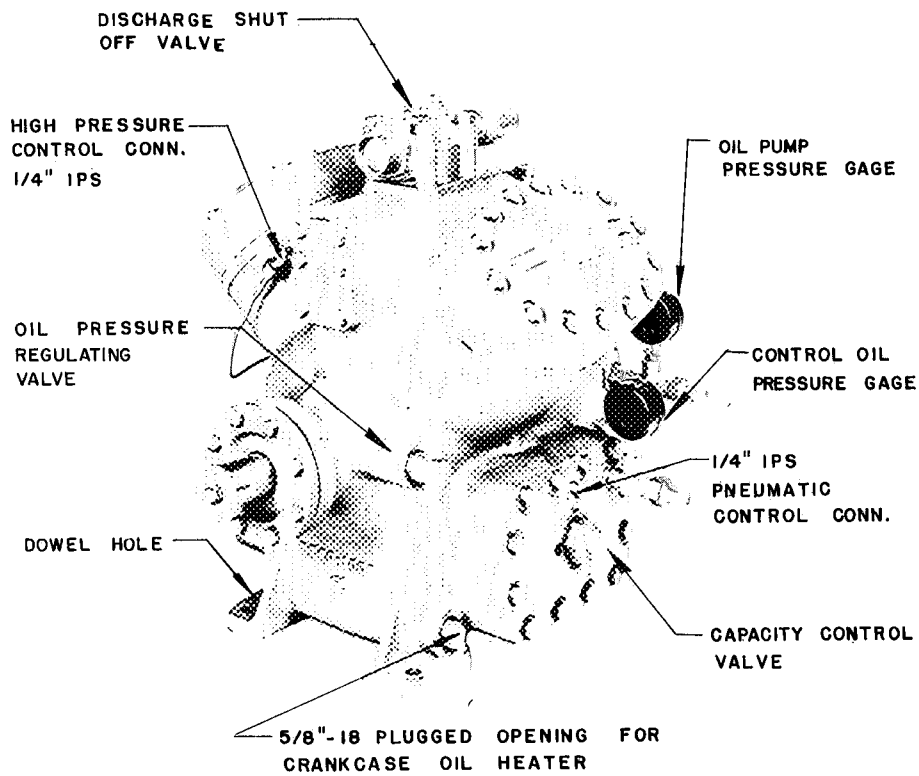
5F40 COMPRESSOR (SIDE AND PUMP END VIEW)
